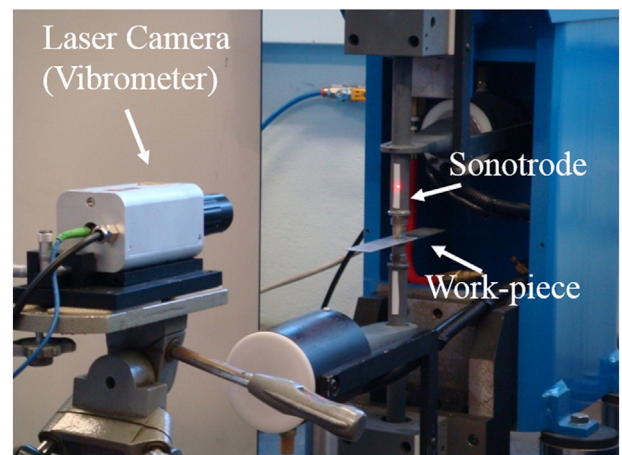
Vibrometer setup on the ultrasonic spot welding machine.
